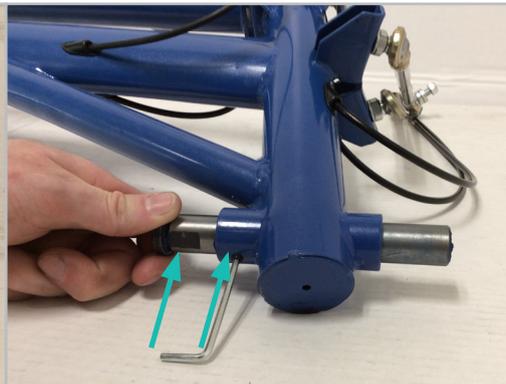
Loosen the set screw under the front beam shaft tube with a 3 mm hex wrench. Slide the shaft into the tube so that the flat section on the rear end of the shaft fits just above the 3 mm screw set.
